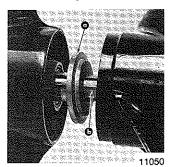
B. Cam-Shift Gear Housing Assembly (Propeller Shaft Components)
